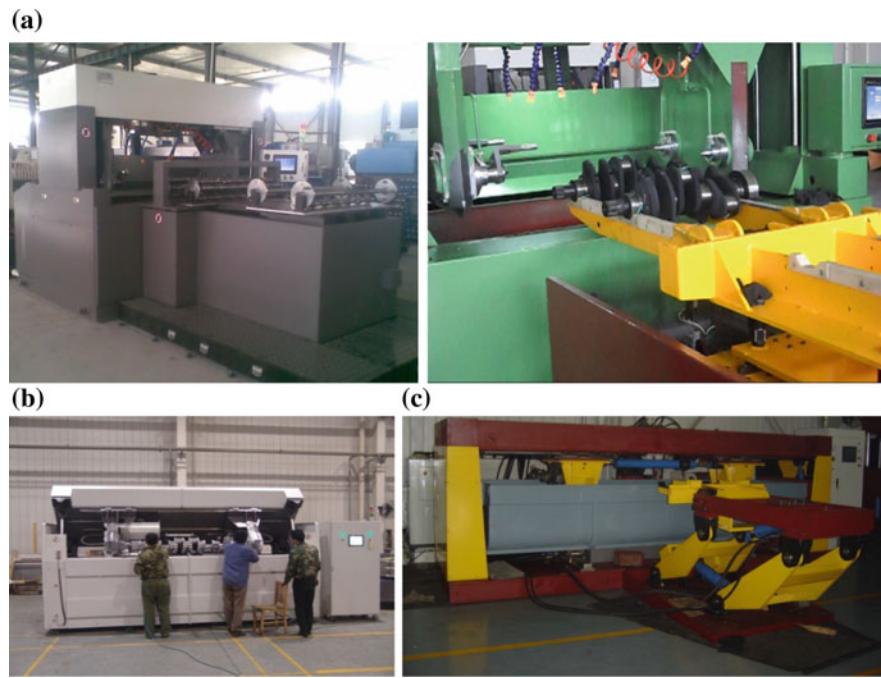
Photographs of horizontal spindle finishing equipment for different types. a W900; b W2000; c W3000
